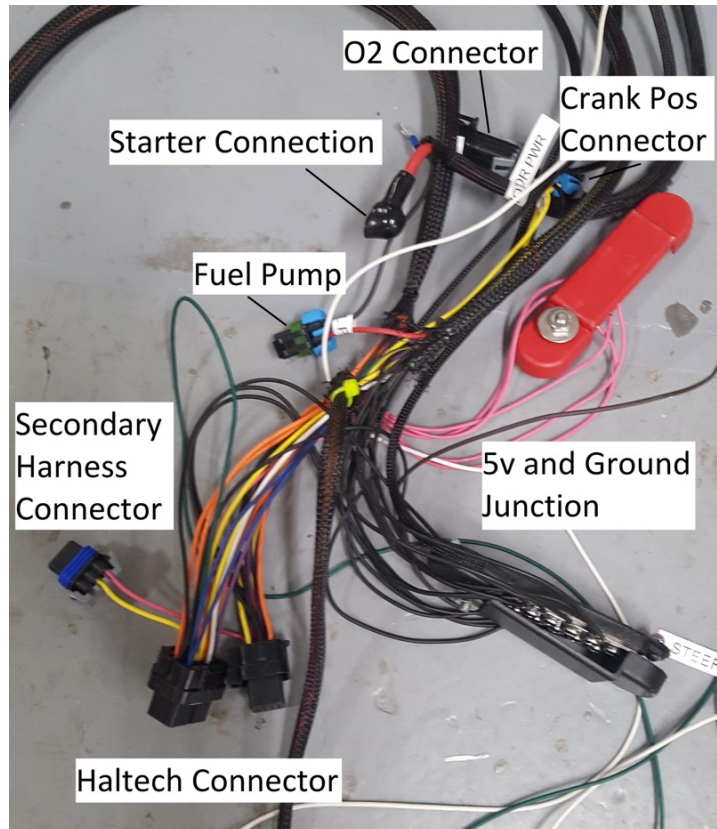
Primary wiring harness Haltech connectors and terminal blocks
